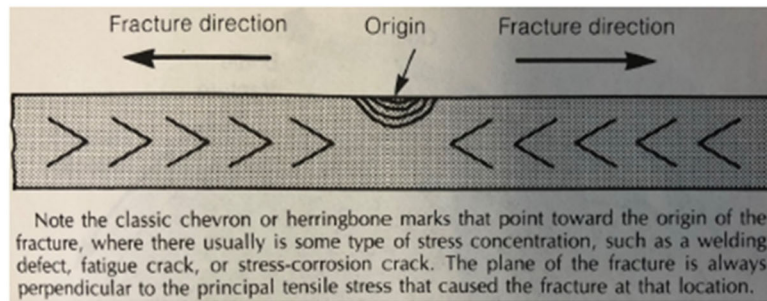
Illustration of chevron marks on a steel fracture surface.⁷³
